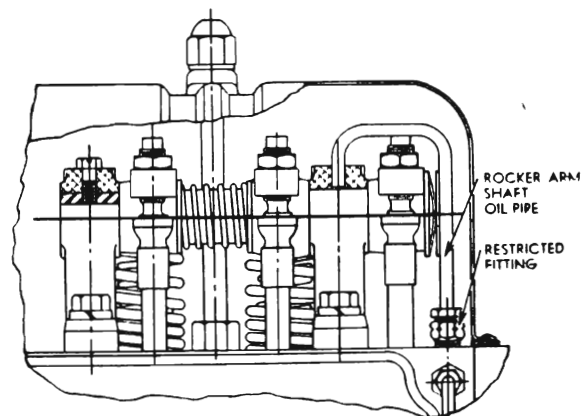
Rocker Arm Shaft Bracket Construction
